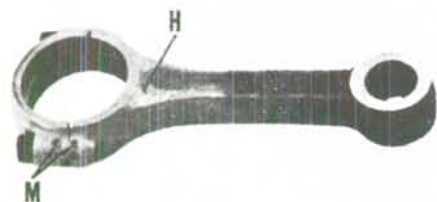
Connecting rod and cap are perfectly mated parts and the fractured joint should be invisible when correctly assembled. Marks (M) should be aligned and oil hole (H) and marks should be toward top of motor when connecting rod assembly is installed.
